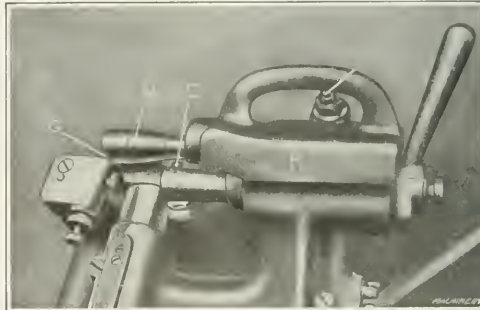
Attachment used in connection with Wheel Truing Device shown in Figs. 27 and 28 for setting Diamond Tools
